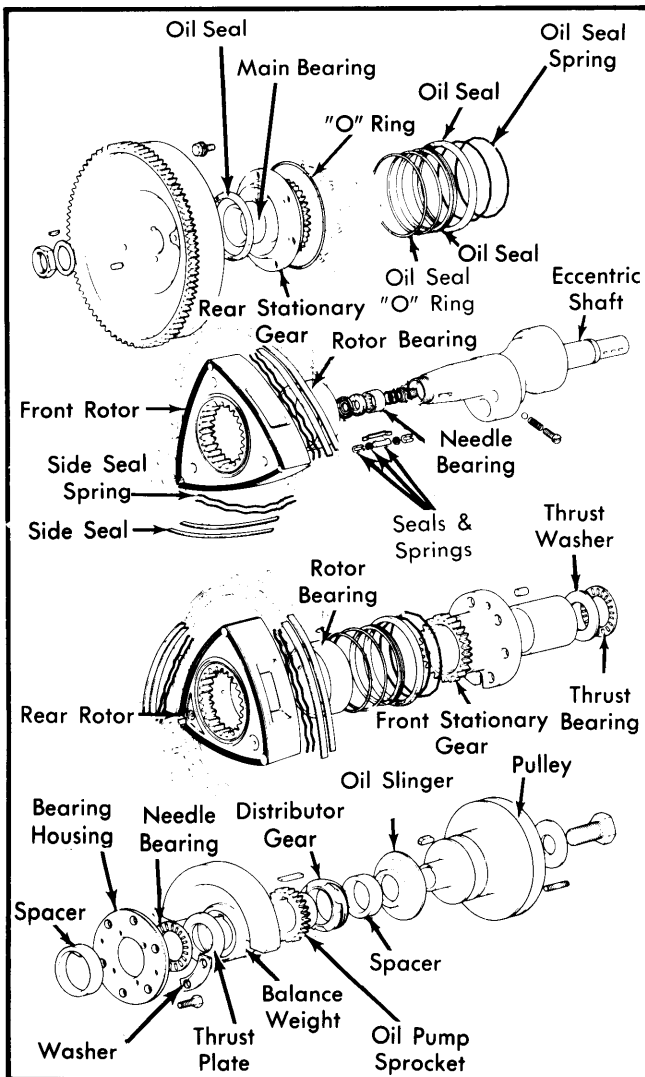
Exploded View of Rotors & Eccentric Shaft Assembly
